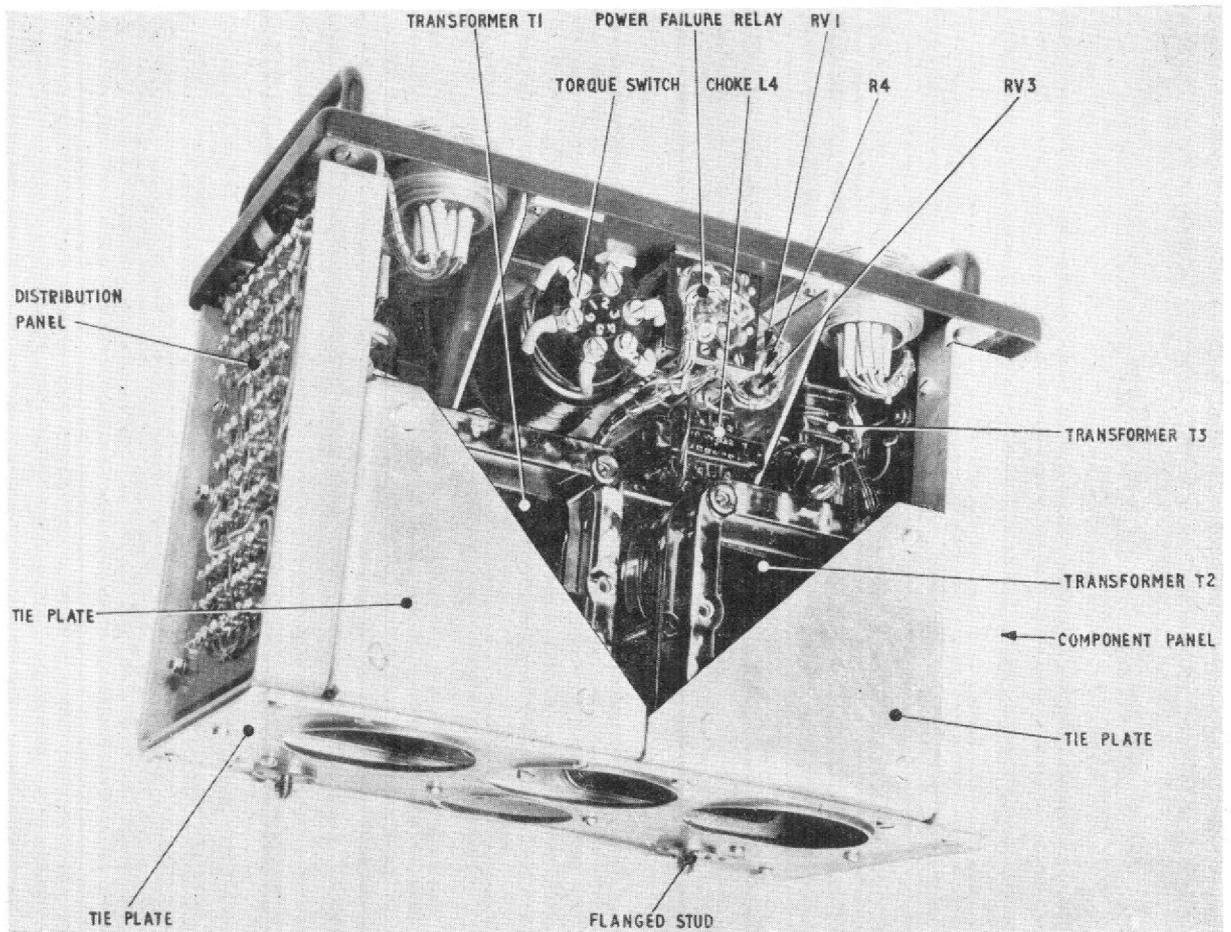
Top view of chassis (pre-mod. ADS/99 and 113)
